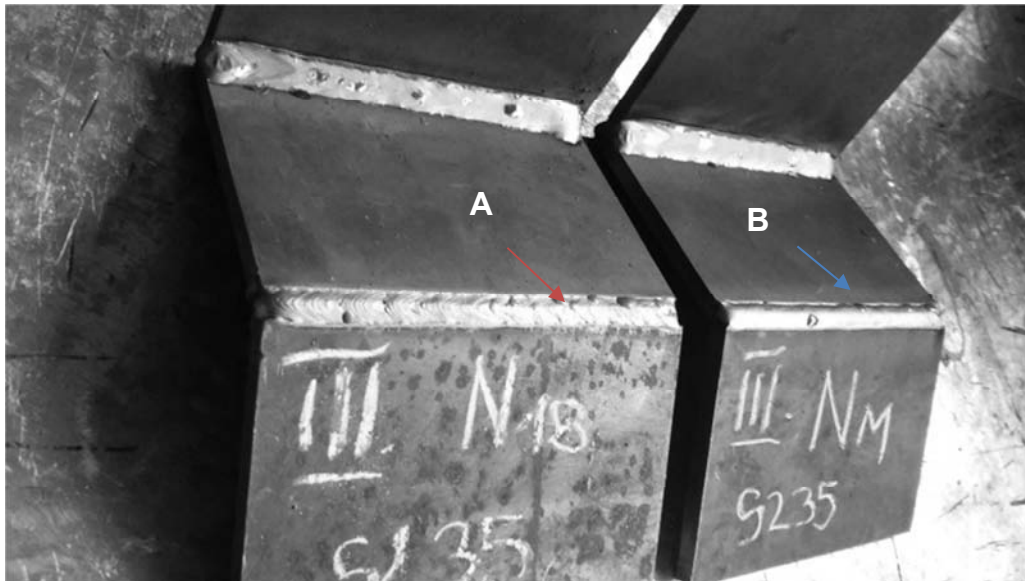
Weld 1, shielded with Ar+18 % CO₂, weld 2 with multi-component mixture
